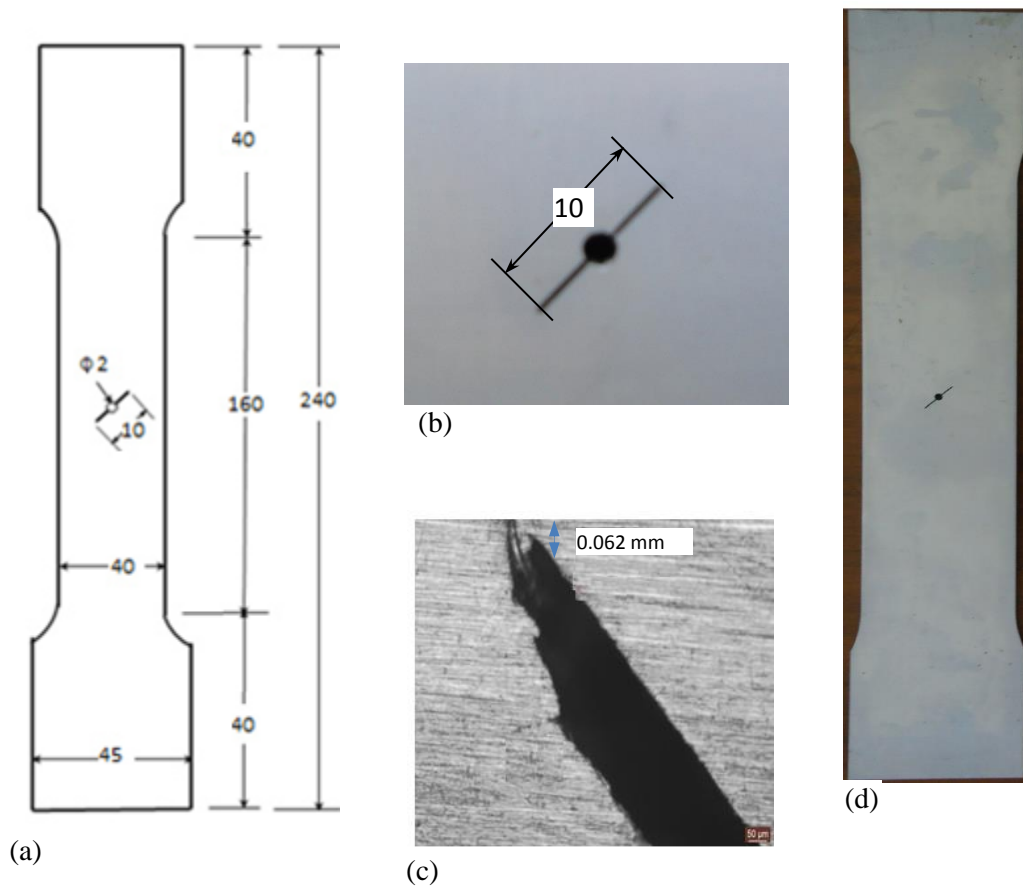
Fabrication of cracked panel (a) specimen drawing (b) zoomed view of crack tip (c) zoomed view of crack tip after pre-cracking (d) entire panel
